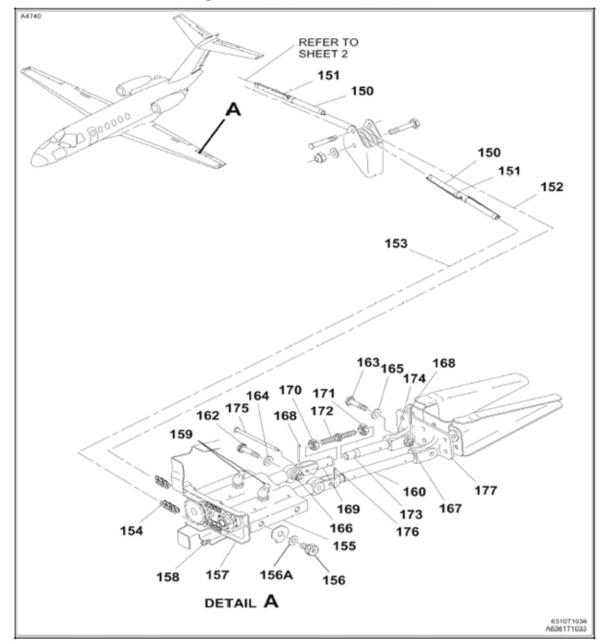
Sheet 03 : AILERON TRIM CONTROL SYSTEM
